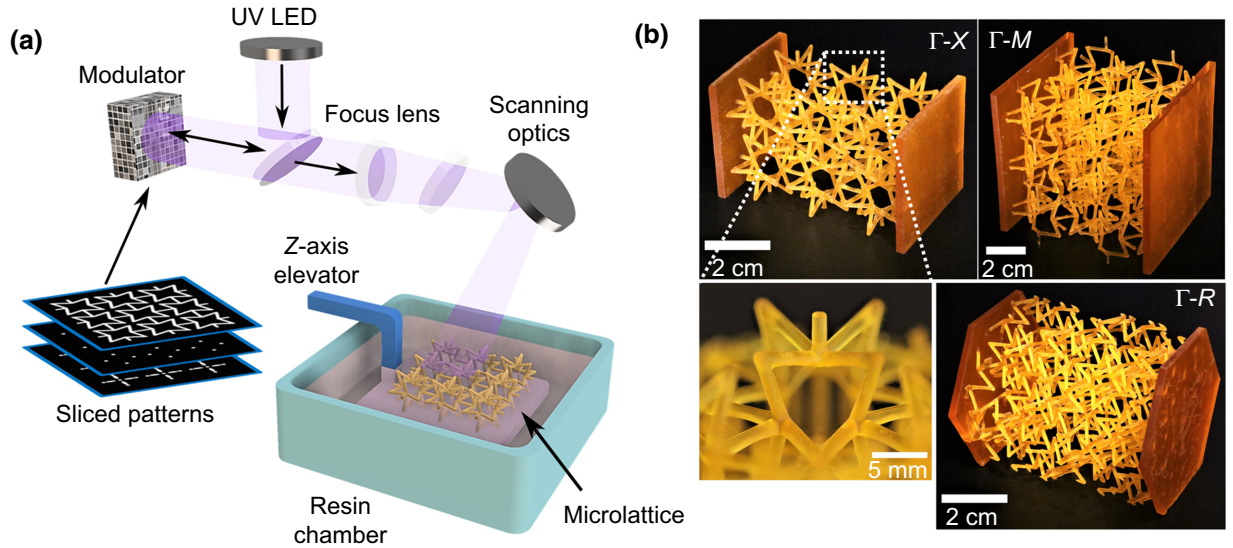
(a) Schematic illustration of the fabrication technique. (b) Photographs of the ultralight isotoxal star-based metamaterial samples, fabricated in the Γ -X (top left), Γ -M (top right), and Γ -R (bottom right) directions, with the same unit-cell dimensions and with period, $p = 2$ cm. Bottom left shows a close-up optical image of the Γ -X sample, featuring the overhanging structure in the present metamaterial.
